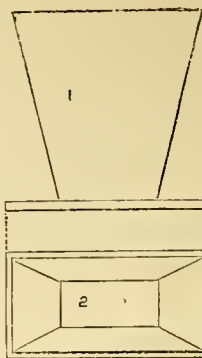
SQUARE VASE. 1, Elevation; 2, Plan.
